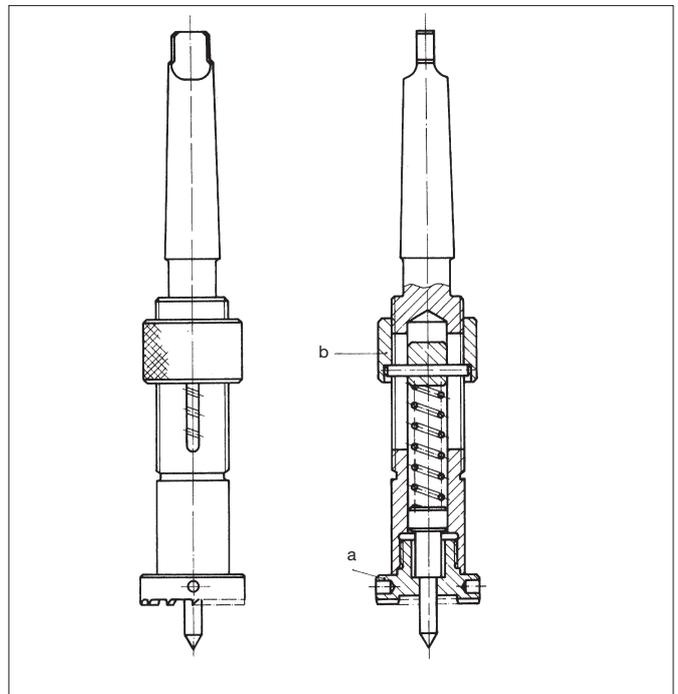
Pivot Welding on Drilling Machines
